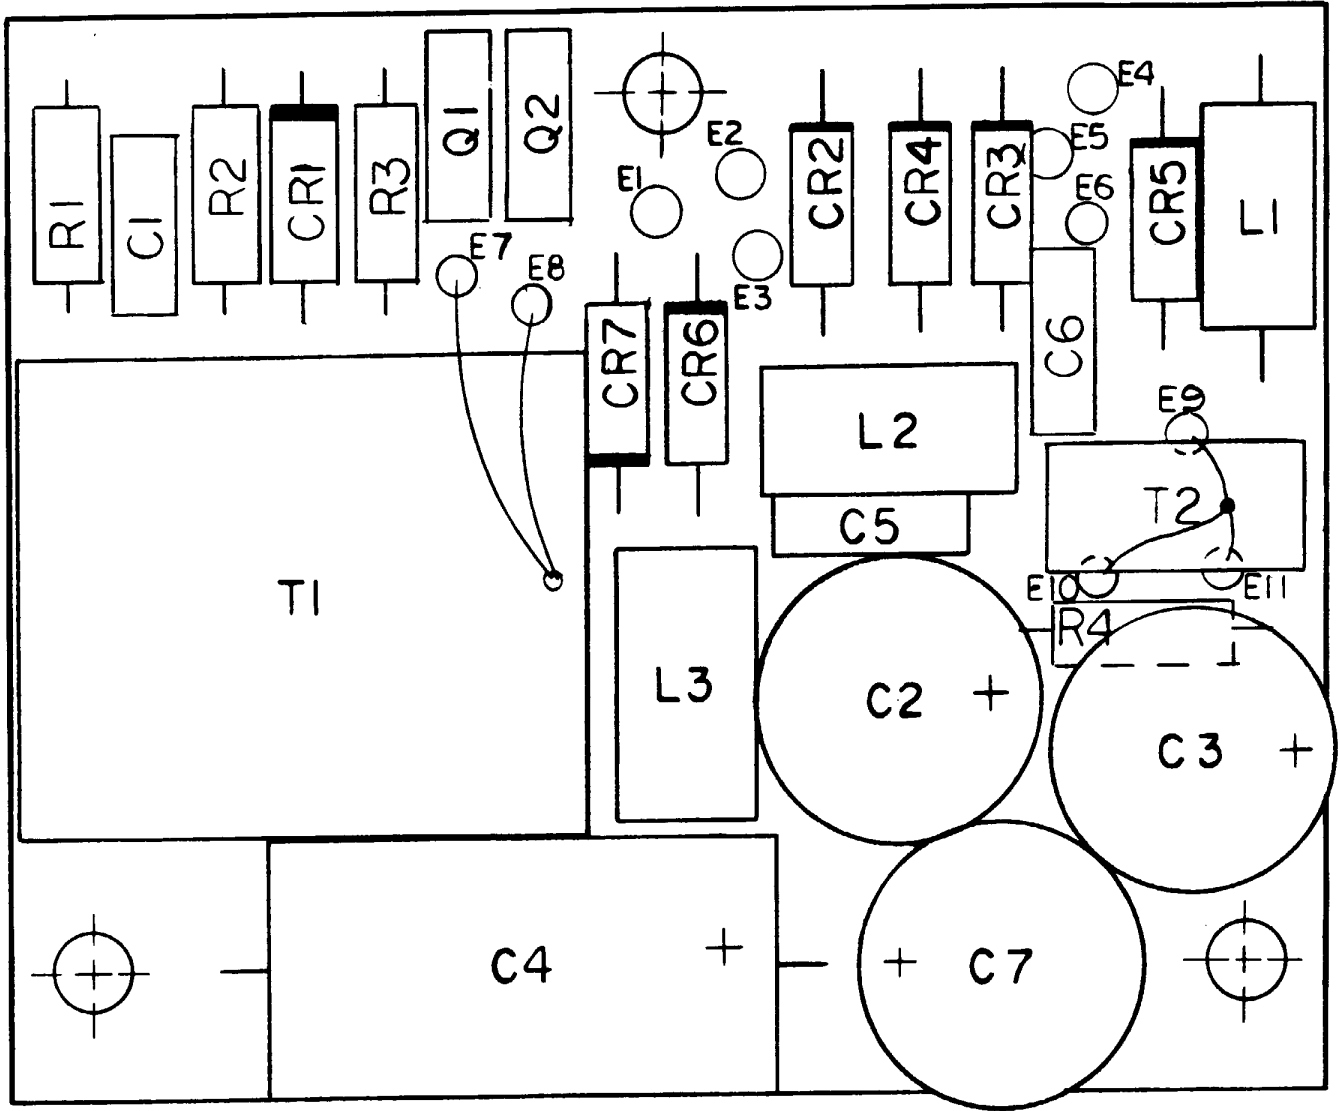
Converter Board Assembly A13A6A1 Component Location Diagram (10073-2260, Rev. D)
